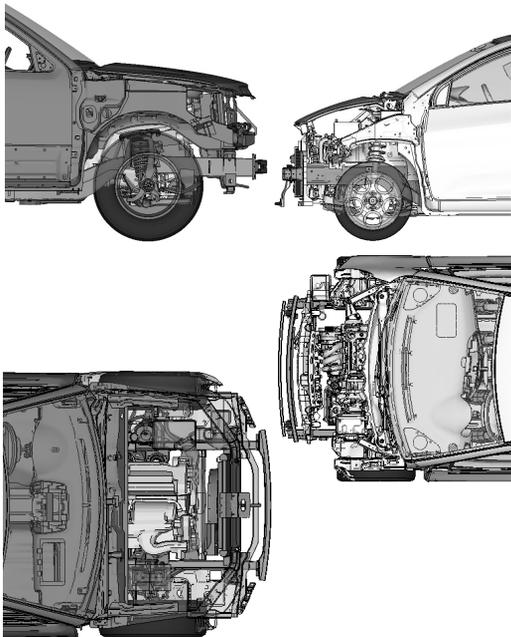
Geometric alignment of front side member between small passenger car and large SUV
